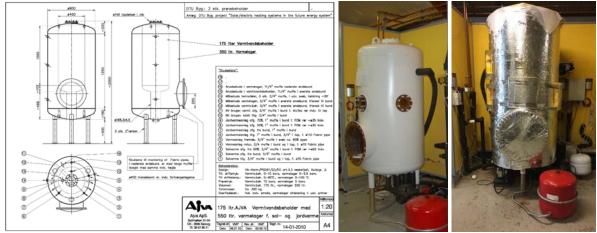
Engineering drawing (in Danish) and pictures of the tank-in-tank storage.
